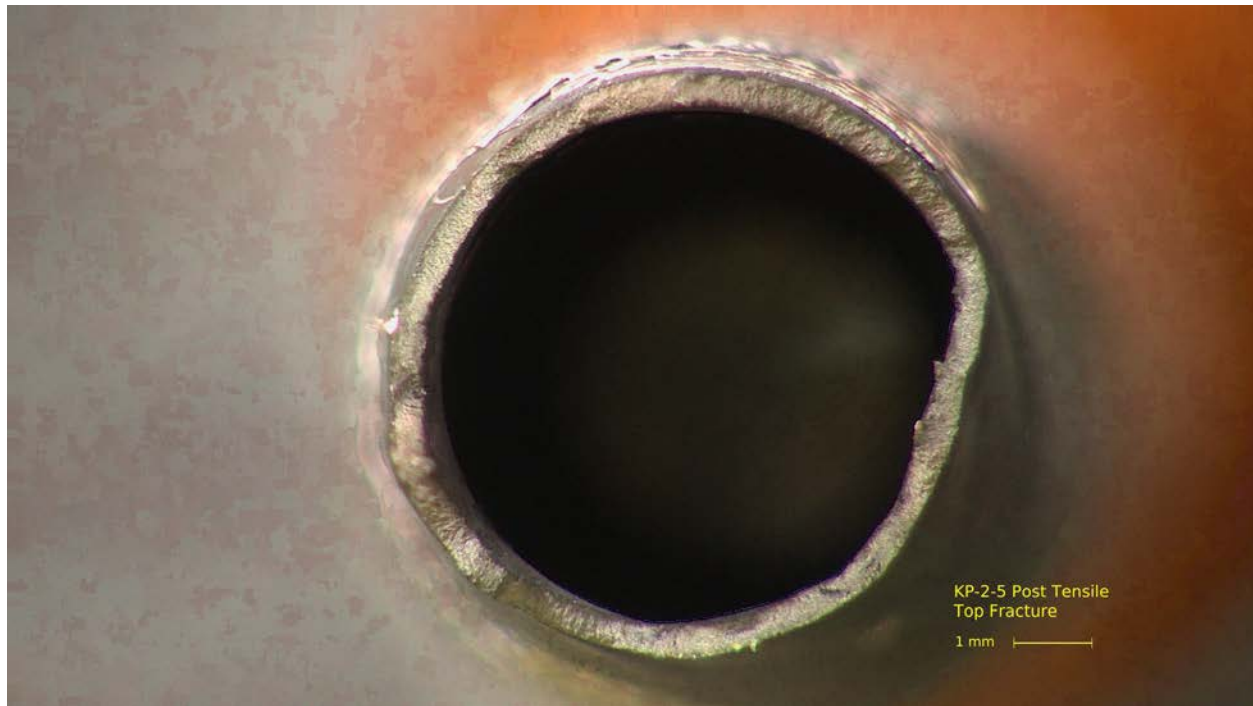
Post-Tensile Image Top Fracture for KP-2-5
